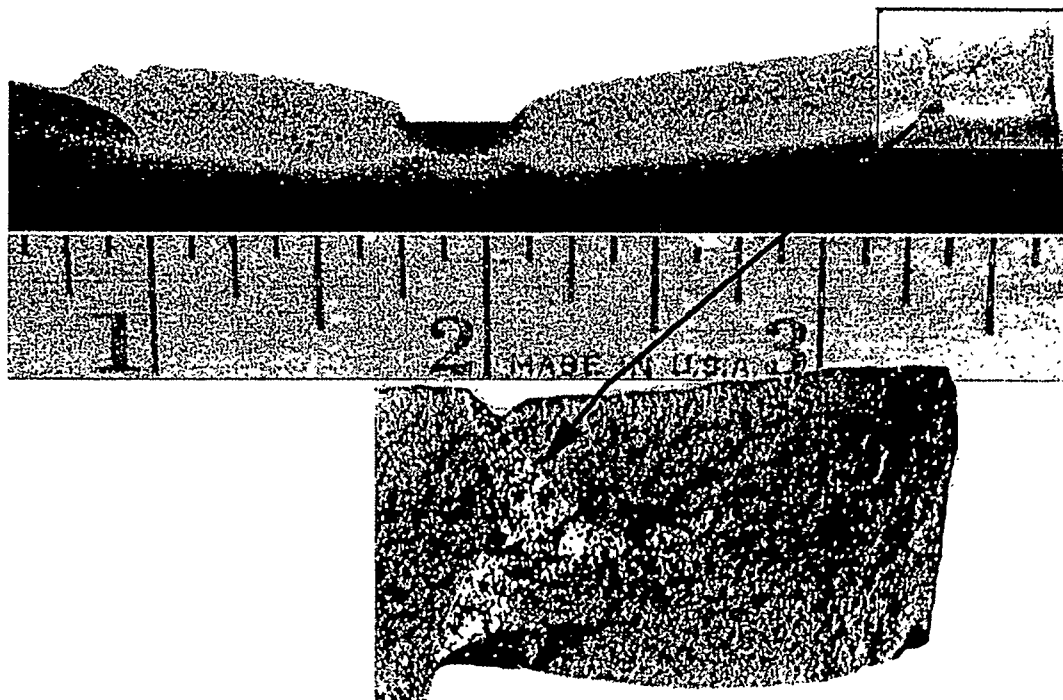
(a) Specimen B-24 fracture surface (inch scale). (b) Inset, magnified, showing band of cleavage traversing the specimen thickness.
